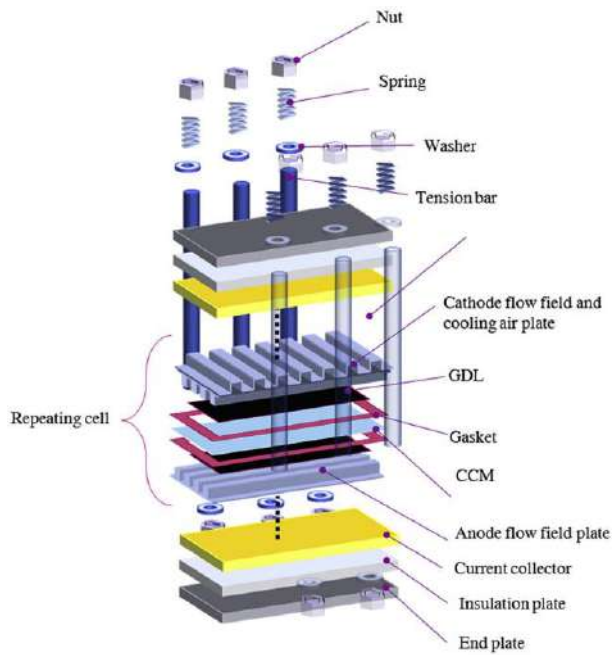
Model of PEMFC with springs and washers in assembly group [30]
